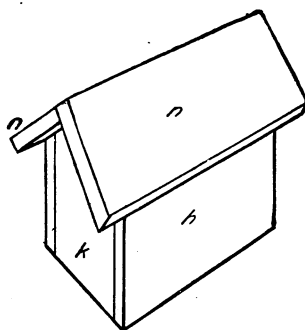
House ready to place over floor and posts as shown in figure 14.
